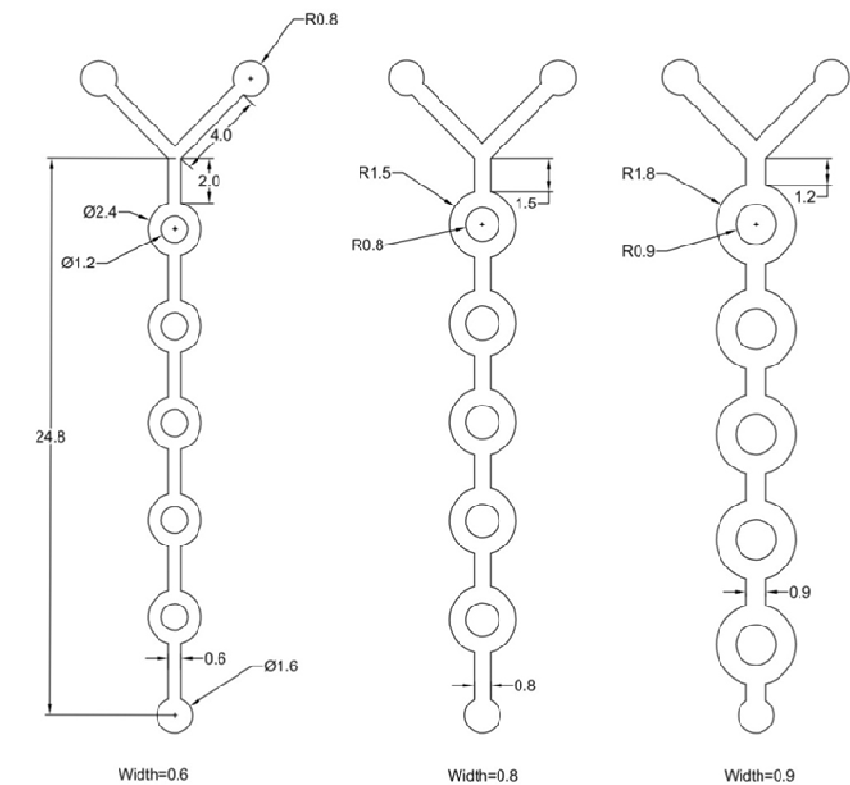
SAR micro channel with Y-shaped mold with different dimensions.
